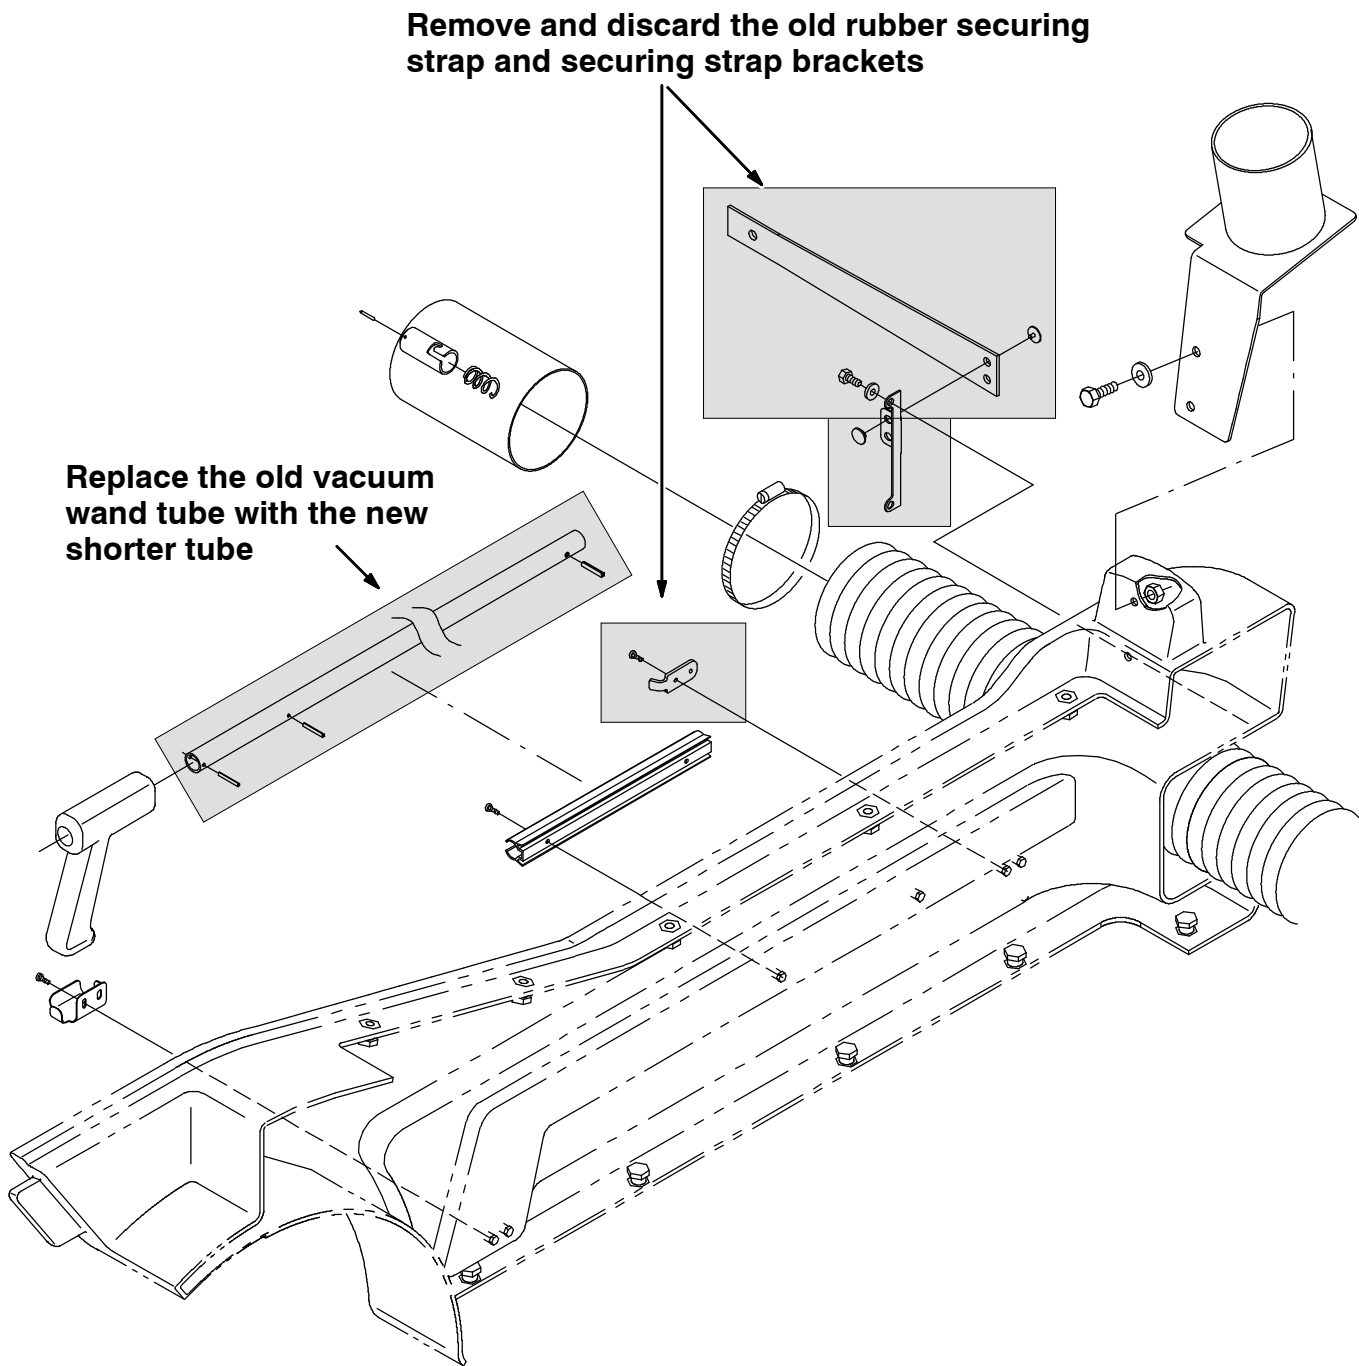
OLD WAND TUBE AND SECURING STRAP REMOVAL
